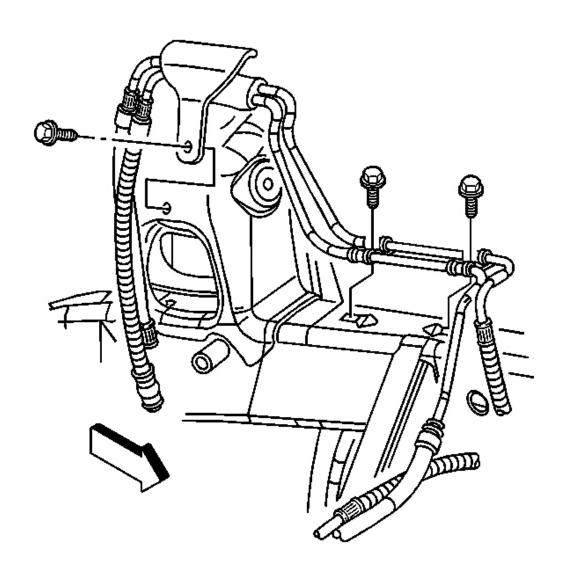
Removing/Installing Power Steering Hose Assembly From Bracket At Wheel Well
